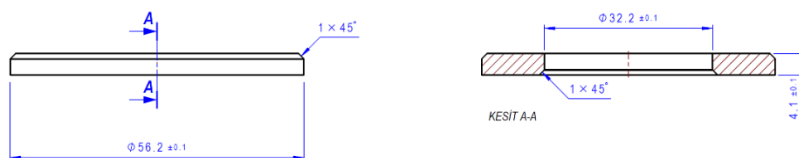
Stainless steel gasket component's detailed engineering drawing
